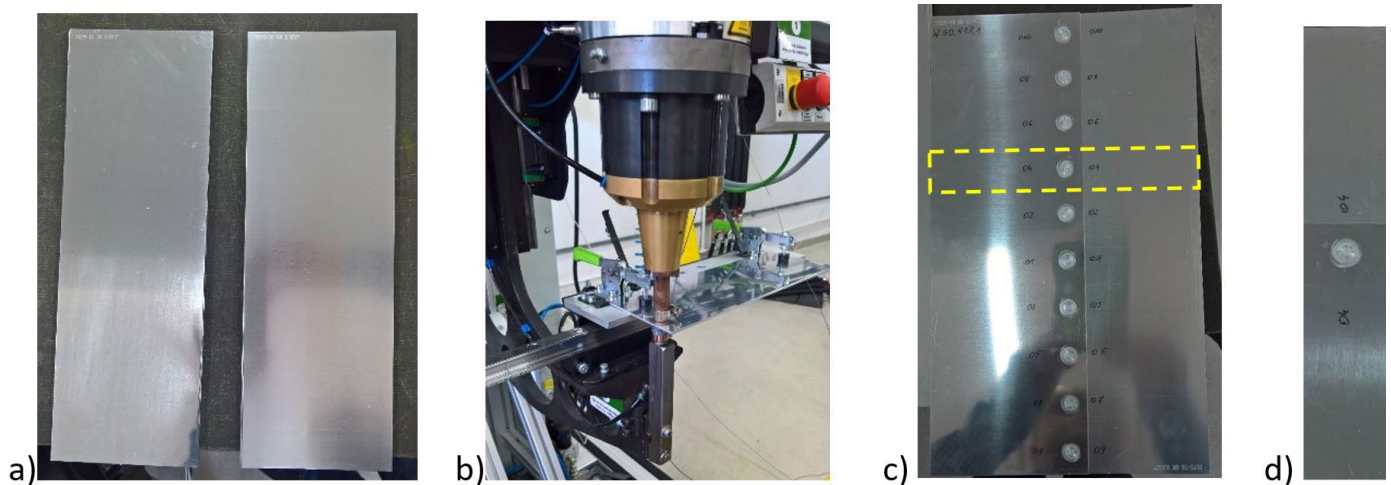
Fabrication process of the samples for tests: a) sheets with dimensions of 356×120, b) joining process, c) sample with 10 joints, d) a single joint (210×30 mm)
